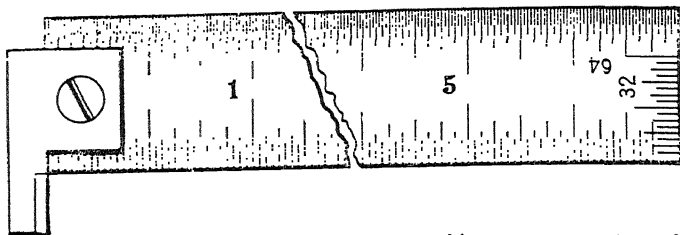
Hooked rule. This rule is useful for taking measurements, and for setting or reading the measure of an inside caliper. (L. S. Starrett Company.)
